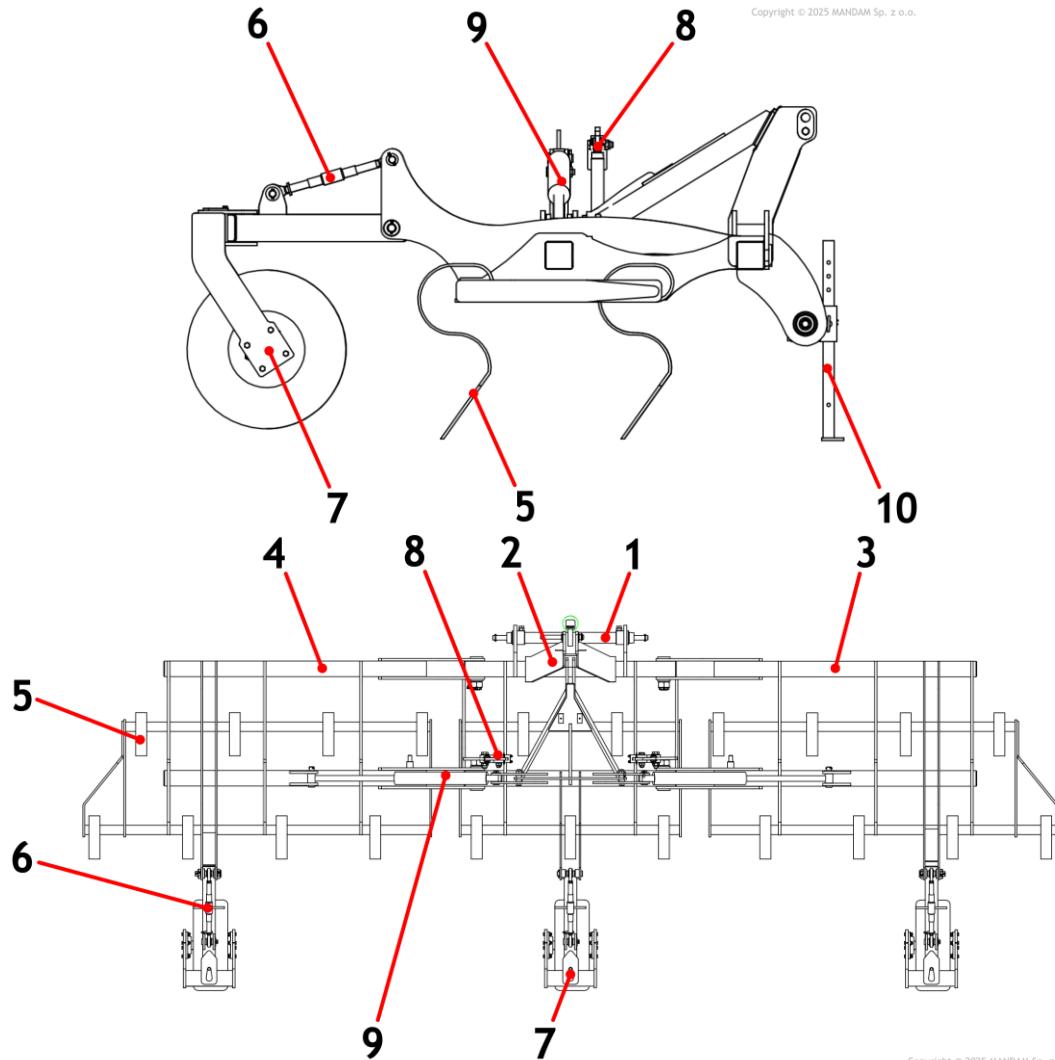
Construction of the cultivator SUPER hydraulically folded 6,0m wide (1 - drawbar, 2 - centre frame, 3 - left frame, 4 - right frame, 5 - spring tine, 6 - turnbuckles for adjusting the support wheel, 7 - support wheels, 8 - automatic wing lock (HBS), 9 - actuators, 10 - support foot)
